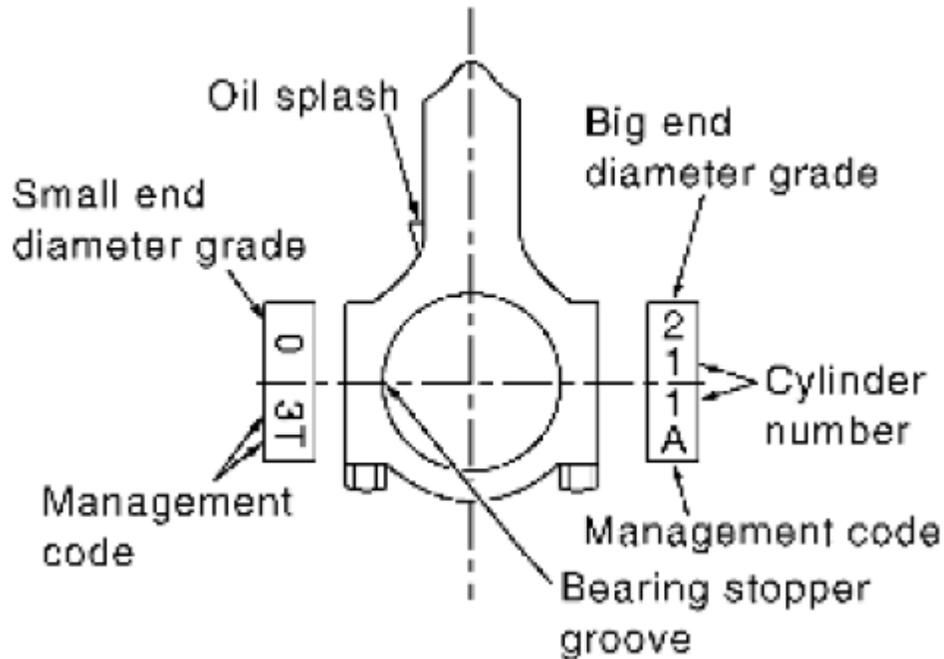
Identifying Connecting Rod Small And Big End Diameter Grade
